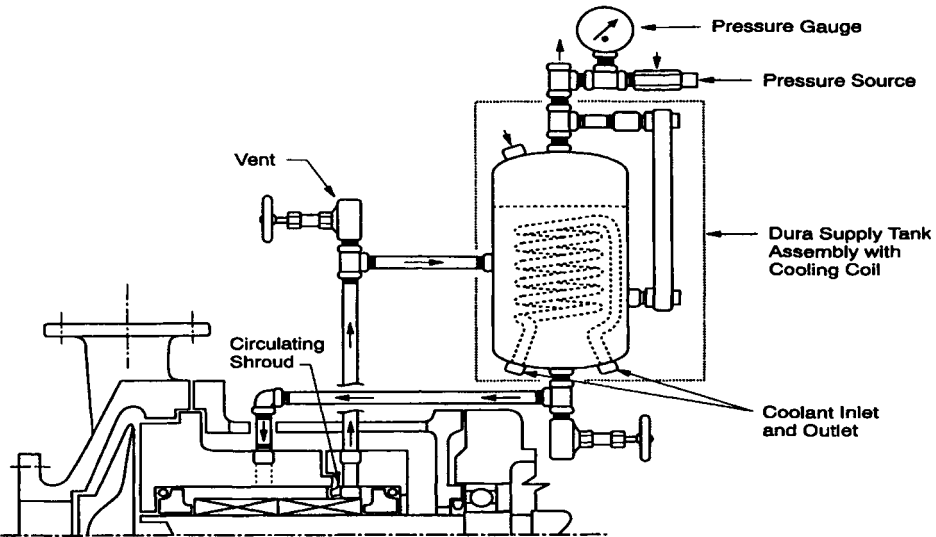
Double inside seal with induced circulation through supply tank with cooling coil (Courtesy of Durametallic Corporation)
